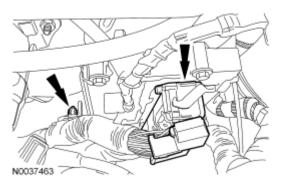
Locating Powertrain Control Module (PCM) Electrical Connector And Pin-Type Retainer Courtesy of FORD MOTOR CO.
